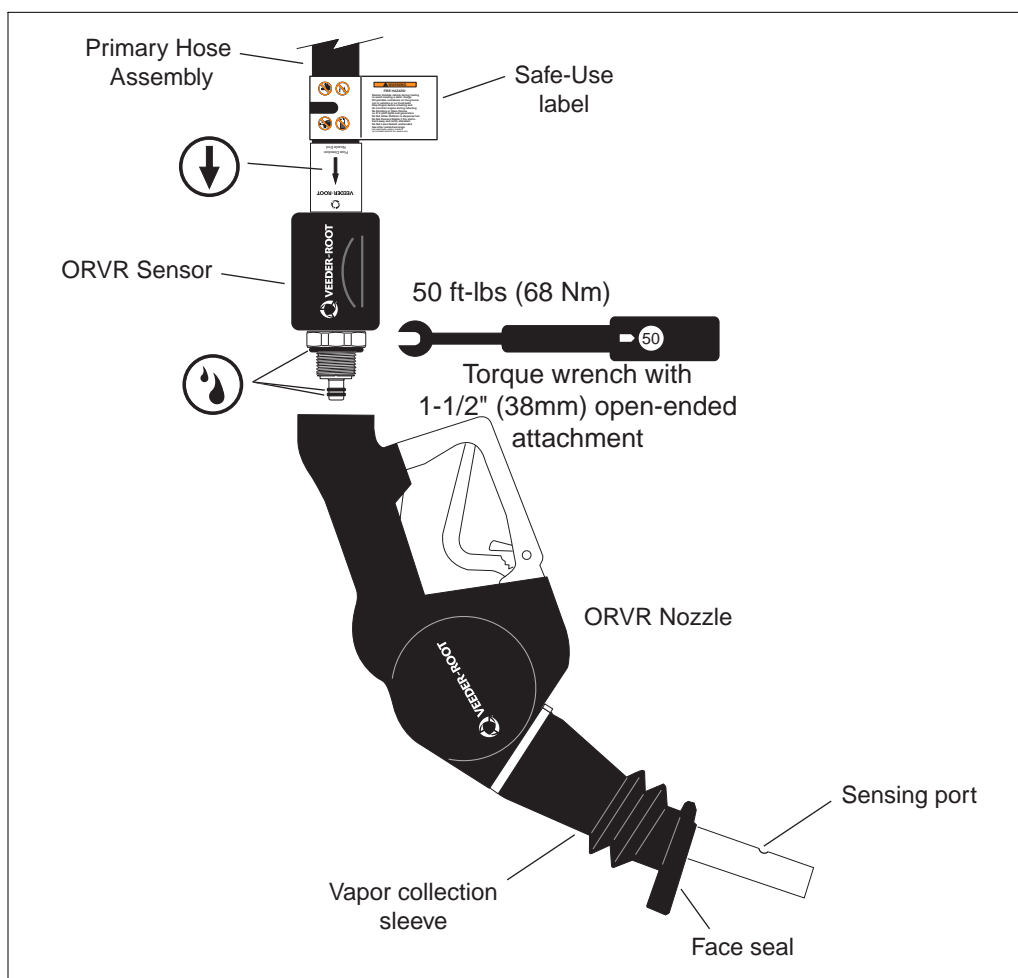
Connecting ORVR Nozzle to Primary Hose Assembly
